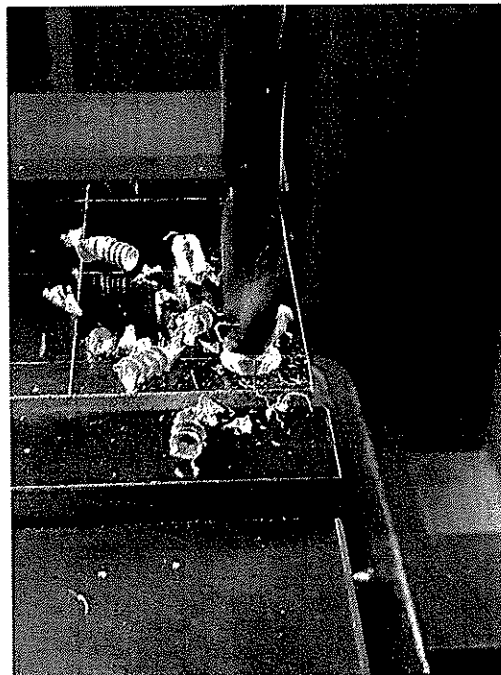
A $\frac{3}{8}$ " diameter hole is being drilled all the through the plate.
